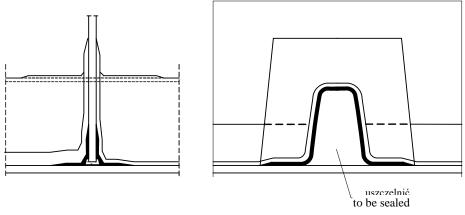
Joint of longitudinal stiffener with bulkhead
